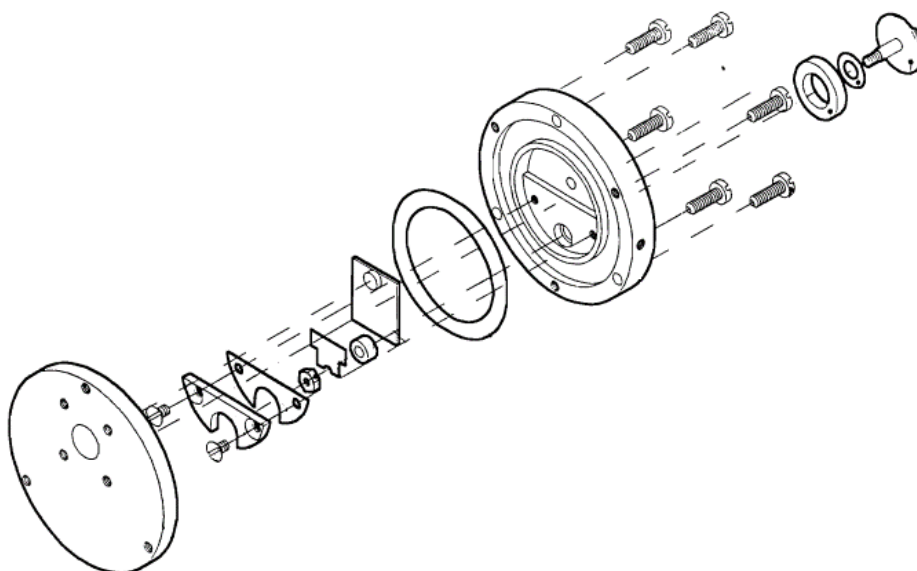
Parts and assembly of the piezoelectric valve according to the original design of Prof. Dieter Gerlich. Figure from reference ¹³⁸.
